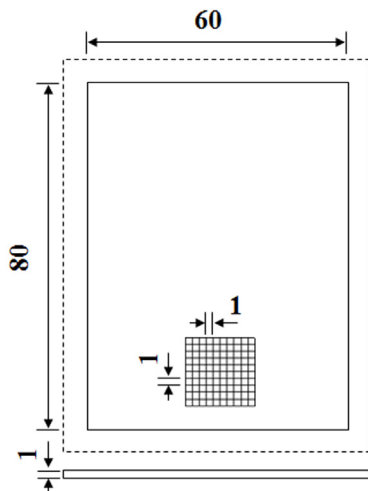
Dimensions of specimen for salt spray test (unit : mm)
